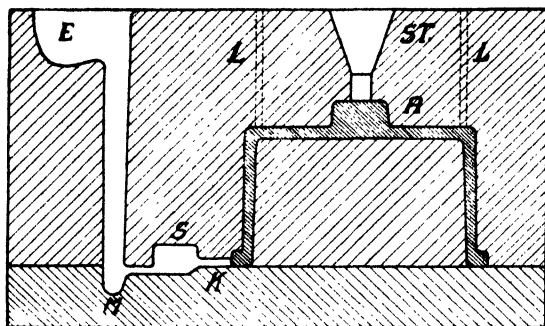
Moulding and gating practice for a hollow cylindrical casting.
